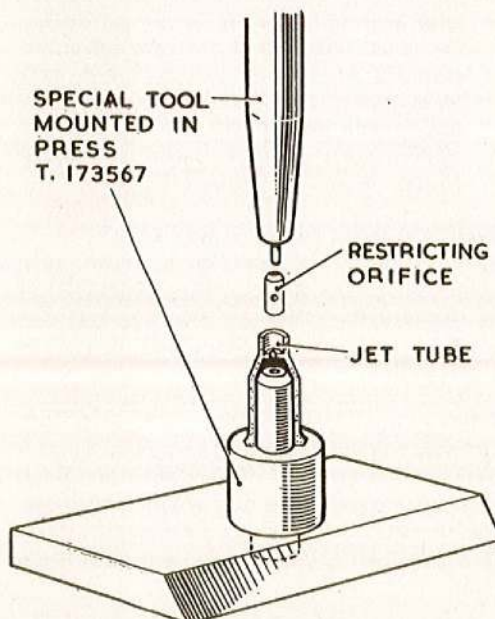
Assembling jet tube to restricting orifice, using tool T.173567
